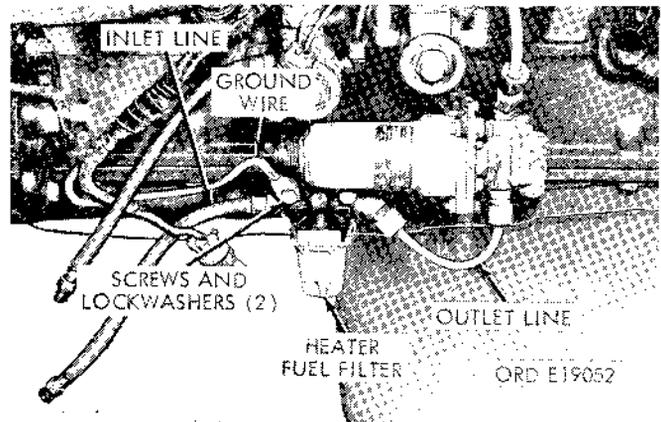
Disconnecting manifold heater fuel filter lines.
